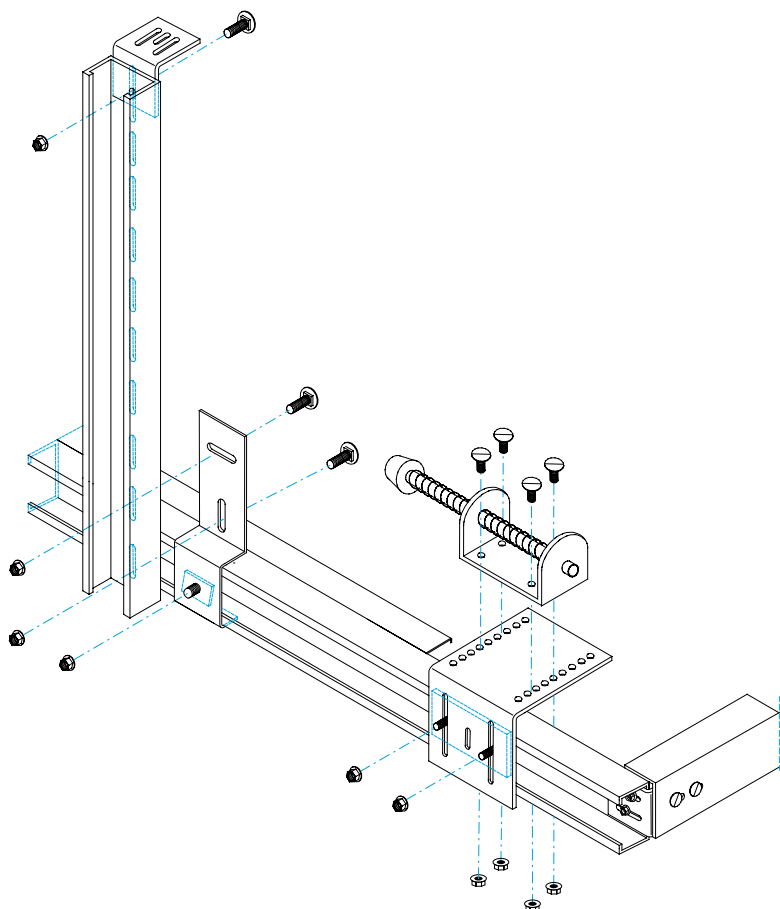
CEILING ANCHORAGE FOR KPSIN DOOR TYPES
